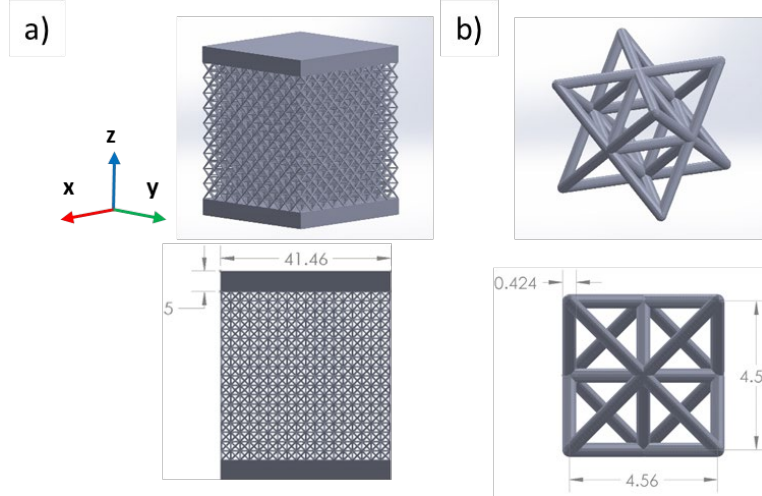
Isometric and front views of nominal designs for the (a) overall specimen geometry and (b) octet truss lattice unit cell. Dimension units are millimeters.
